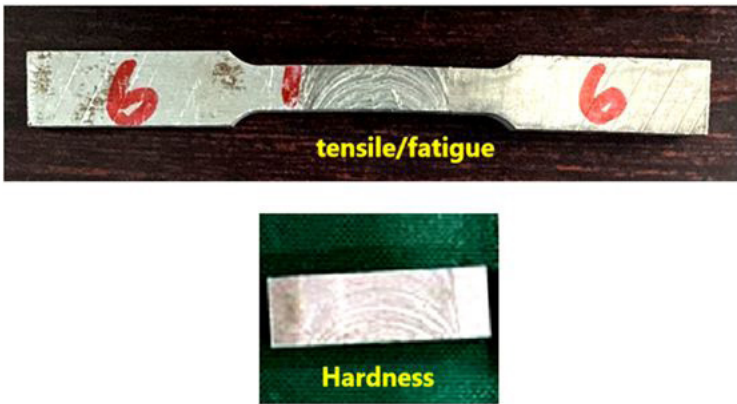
Photographic view of tensile/fatigue and hardness test samples.
